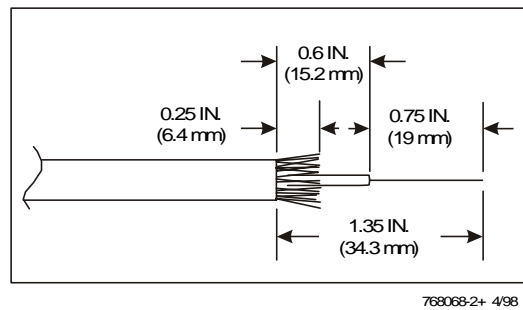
Recommended Dimensions for 1.6-mm MiniCord™ cable and 9000 Series Cordage
